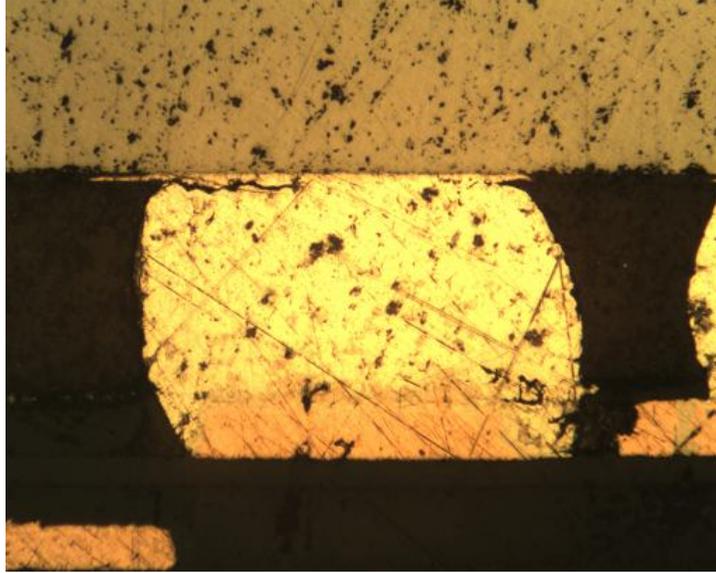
Epoxy 2 on FLEX Substrate Solder Ball Crack and Solder Extrusion into Void, 1200 Cycles
